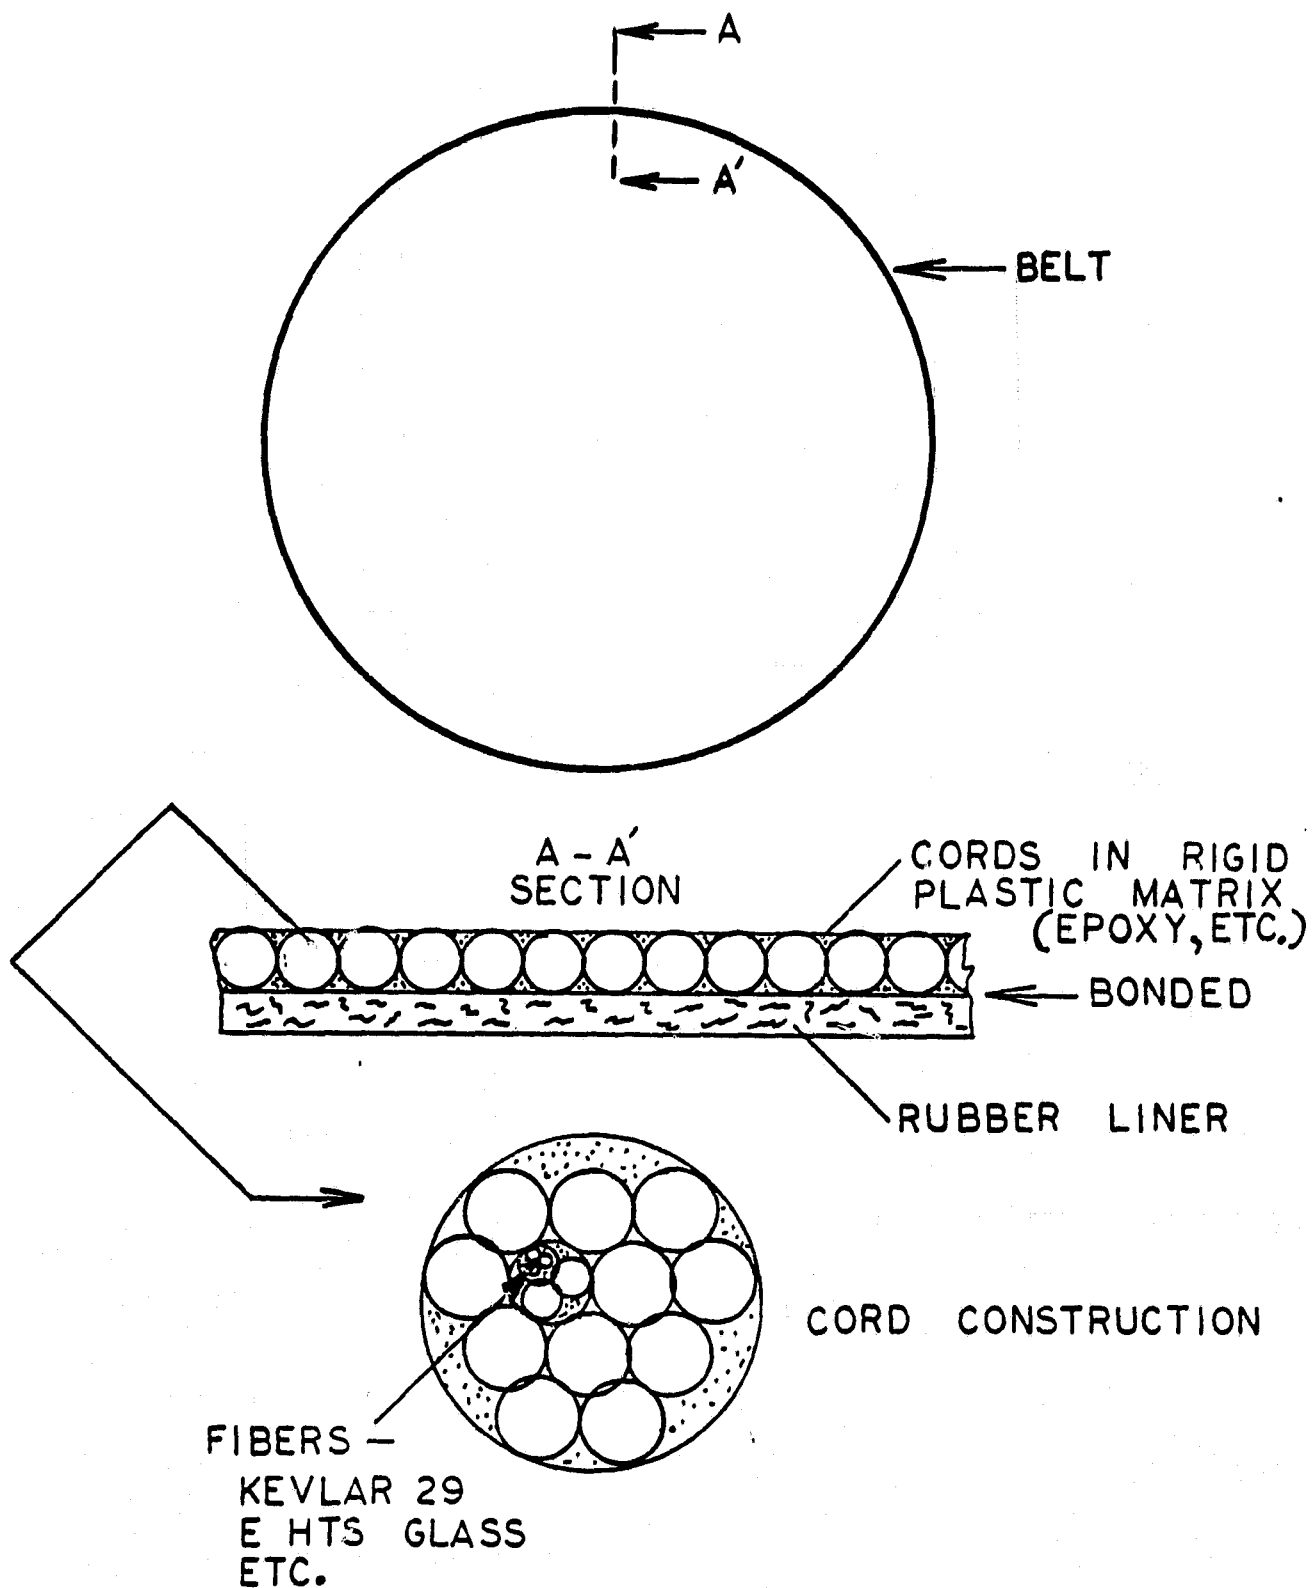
FATIGUE RESISTANT BELT DESIGN
